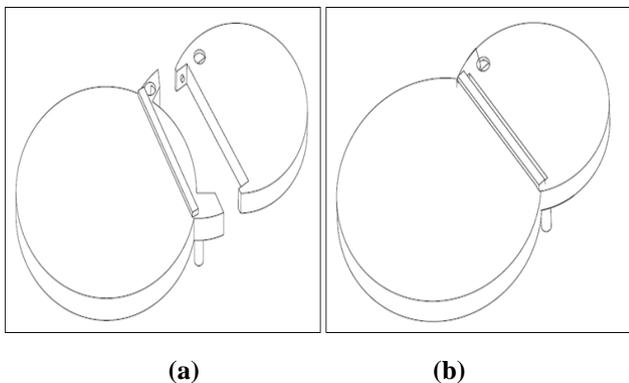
Combine filter cover to tank cover (a) old design (b) new design
